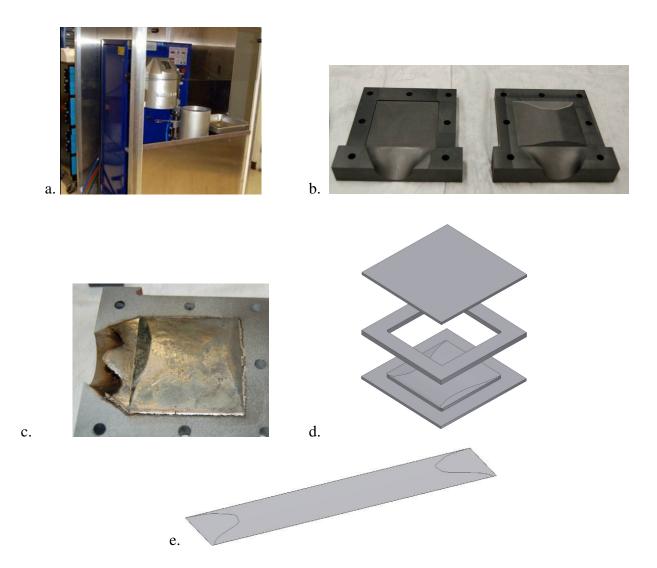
Graded fuel foil fabrication: a) Indutherm pressure over vacuum induction caster, b) graphite mold for complex-shape coupon, c) Image of cast, complex geometry, stainless steal coupon/ingot, d) drawing of three-piece rolling can assembly, and e) drawing of resulting full size contoured foil.
